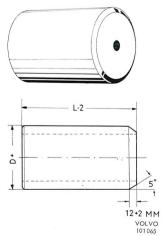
Press drift for fitting field winding D = 66.4—66.09 mm (2.599—2.602") L = 85 mm (3.346")
